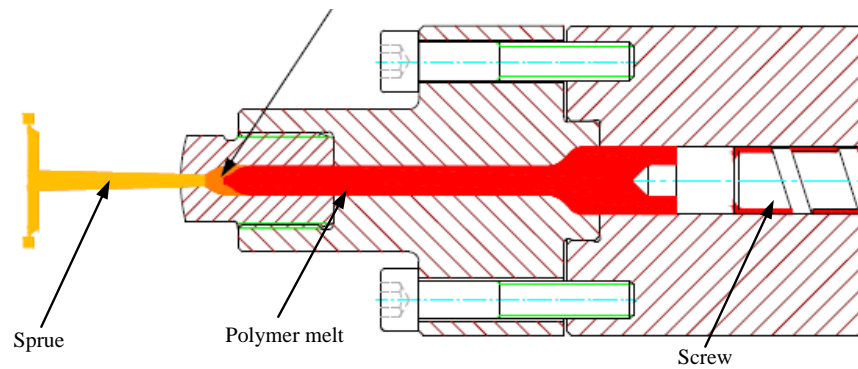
Machine with a single step system (Taken from [39] and modified)
